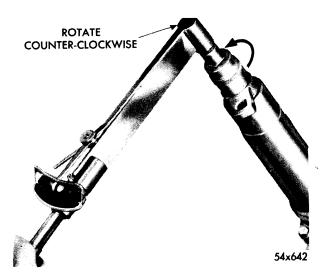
Adjusting Worm Housing Bearings (Inner)
